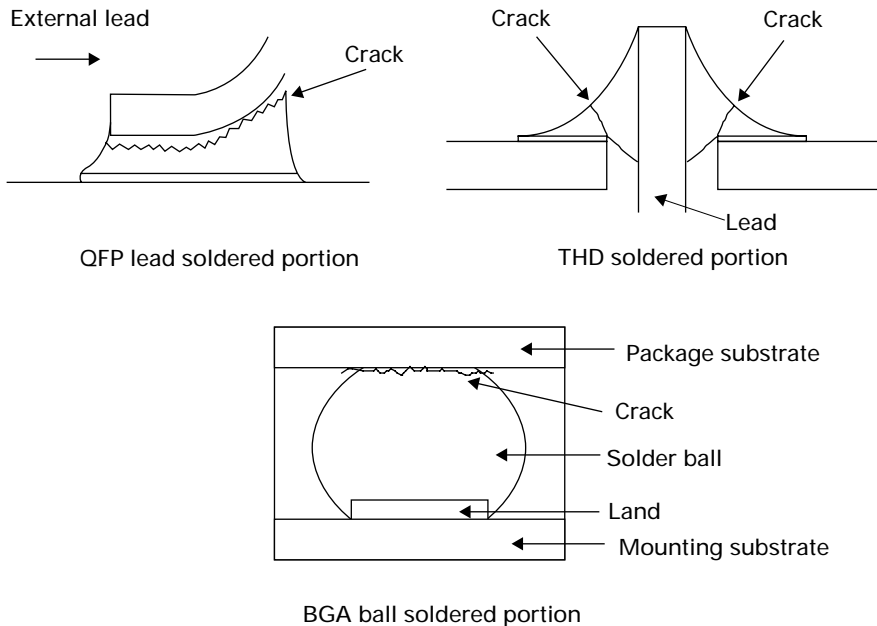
Soldered Portion Failure due to Cracking
